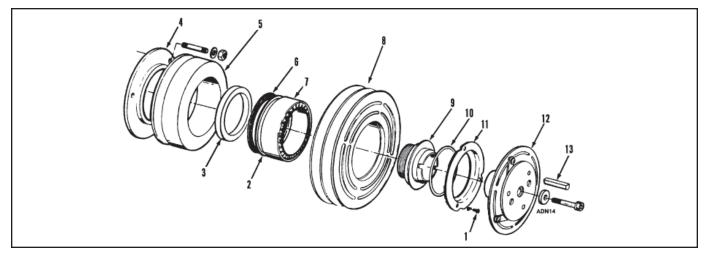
Clutch Assembly - 7.75 in./8.9 in. Diameter Pulley
